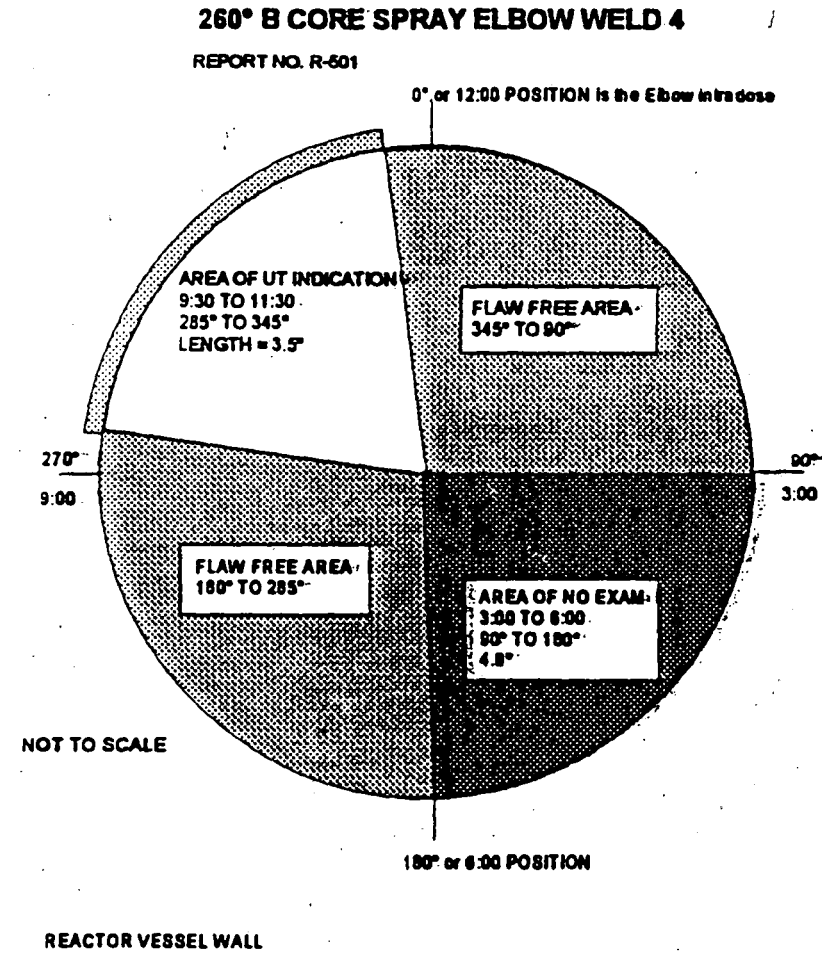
Ultrasonic Testing Examination Area And Flaw Location Elbow Weld 4
